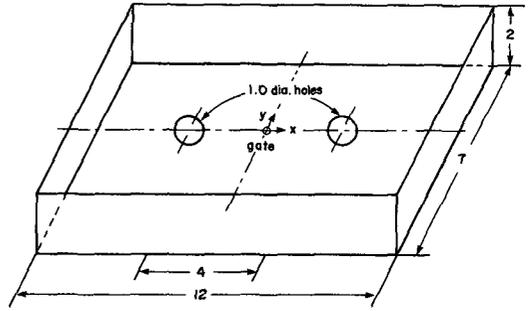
Cover with two screw holes : Indicated dimensions are units of cm.
